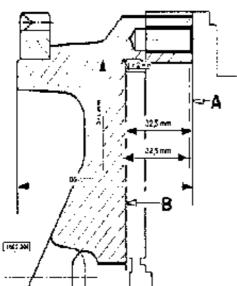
Machining depths for clutch matching surface of the flywheel.
